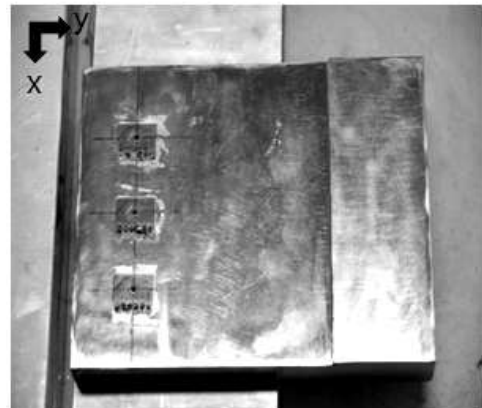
Measuring positions of SA508 Gr.3 specimen
